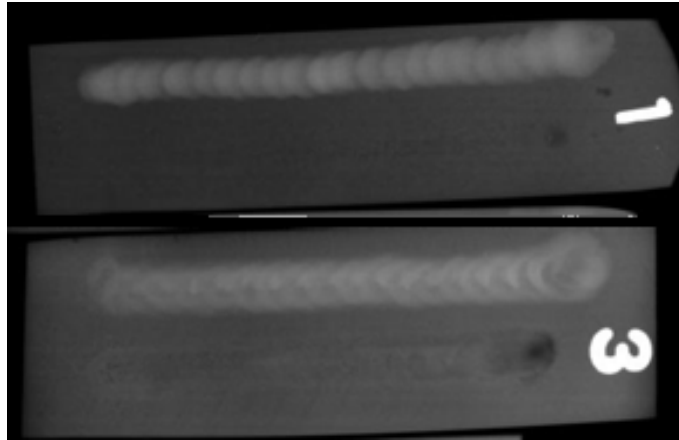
C.1.1. X-ray non-destructive evaluation of welded AA6061 (top) and Al6.6wt%Cu specimen (bottom).
